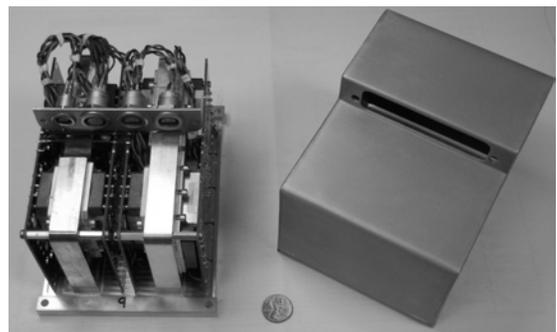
Power supply showing the bottom cooling plate and the two internal heat sinks with DC:DC converter modules mounted on both sides
